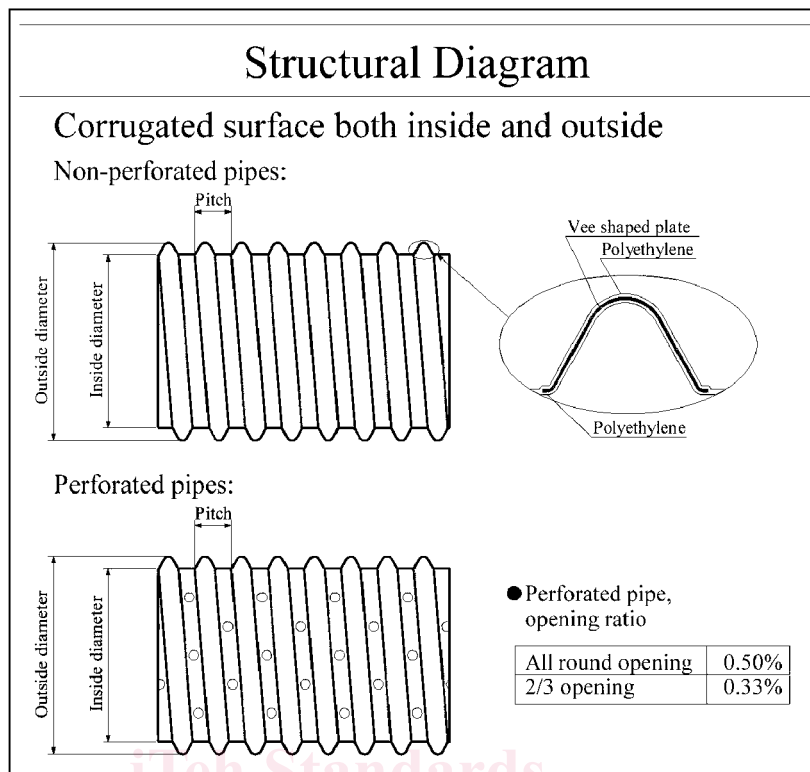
Single - Wall Steel Reinforced Corrugated Polyethylene Pipe
